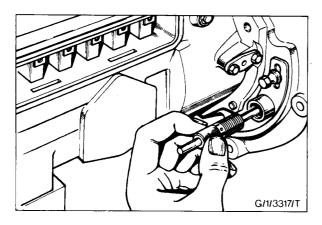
Fitting the Timing Tool to the Pump (Dover)
